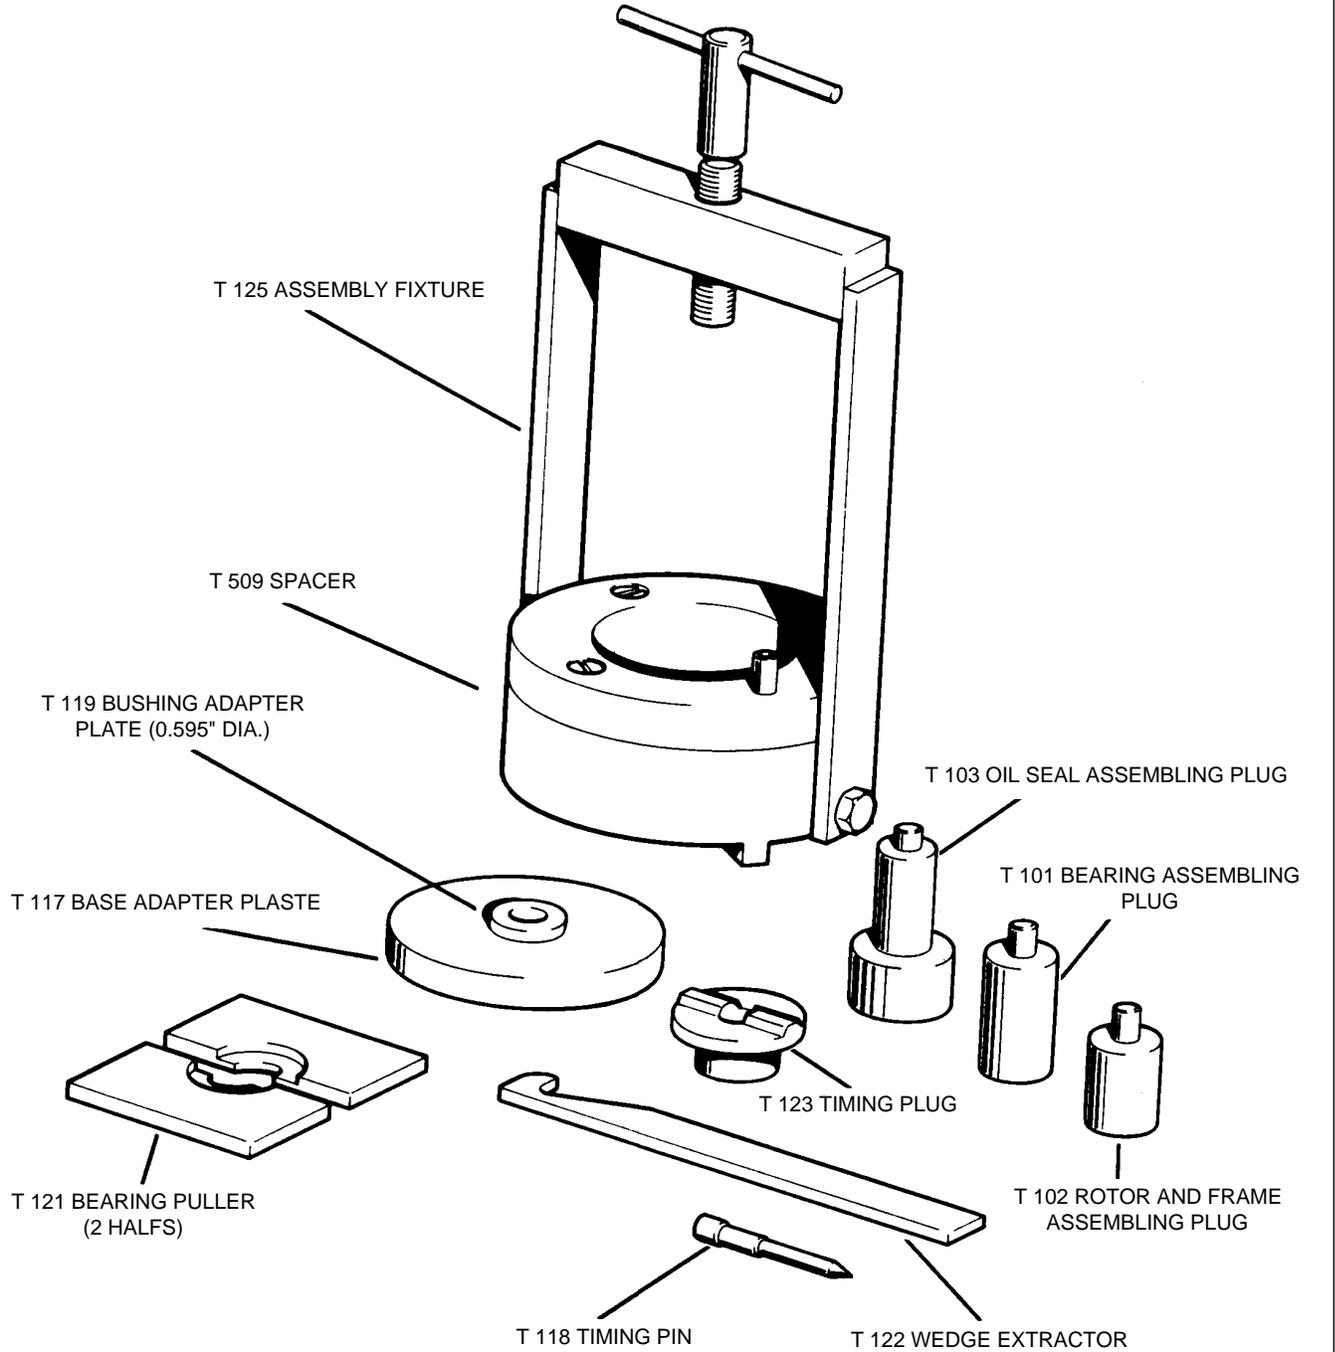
T-1000 Assembly and Timing Tool Kit
